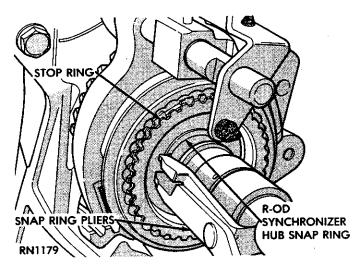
Removing/Installing Reverse-OD Hub Snap Ring
